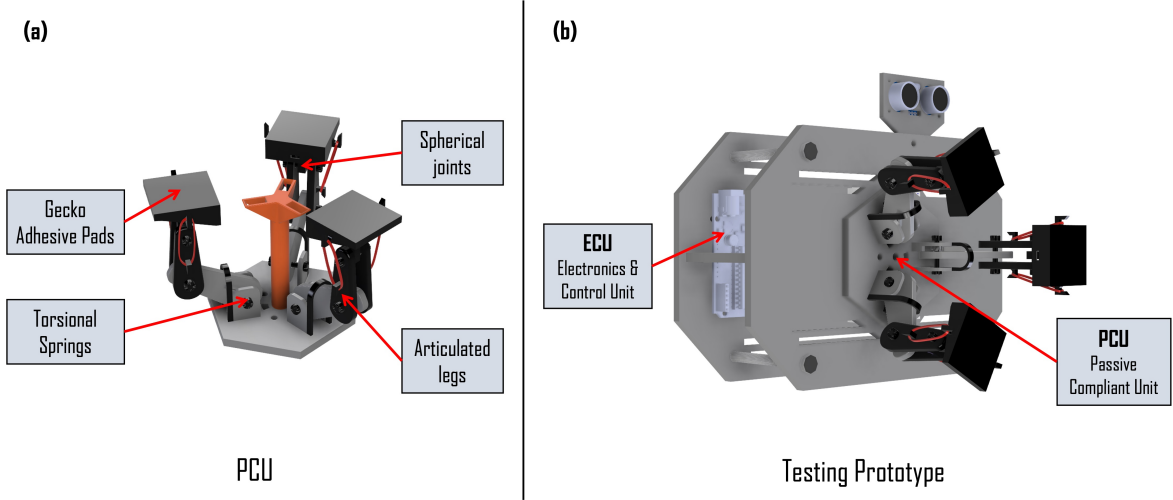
(a) CAD of the PCU Prototype. (b) CAD of the Testing Prototype.
